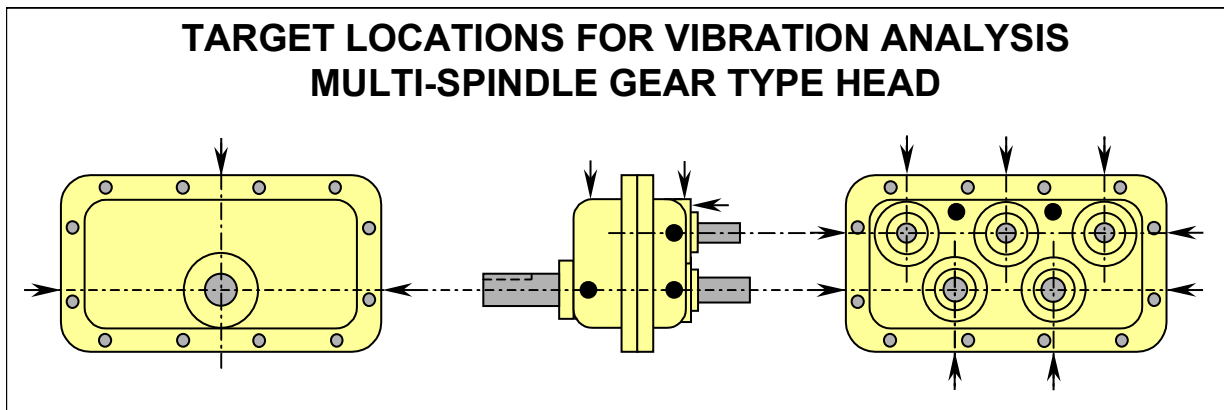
C Measurement Locations for Multi-Spindle Gear-type Head
